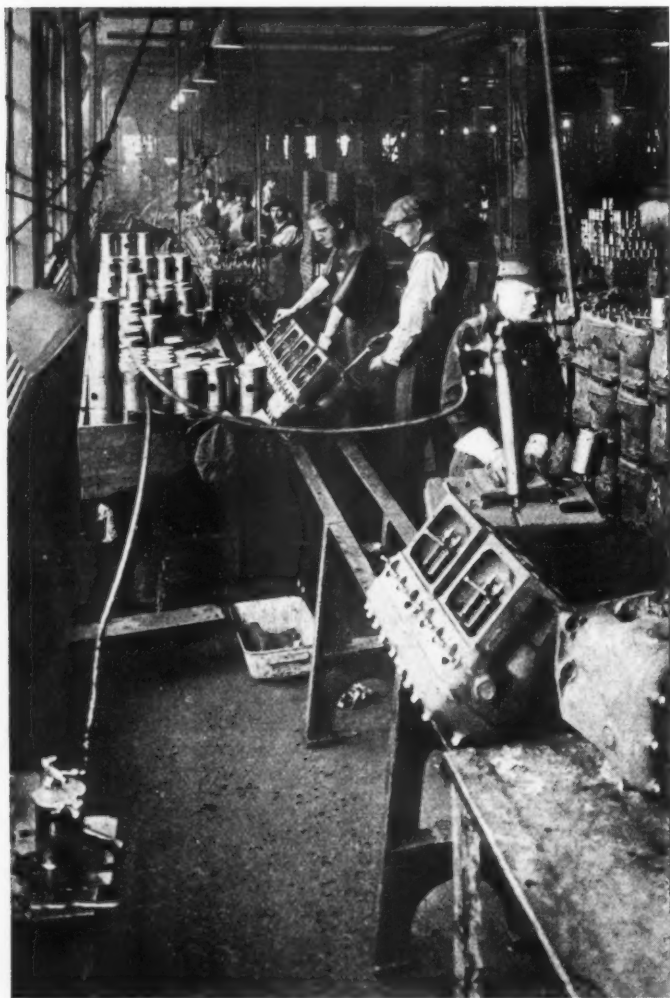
Assembly department, showing racks tilted to the proper angle for fitting pistons to cylinders.
